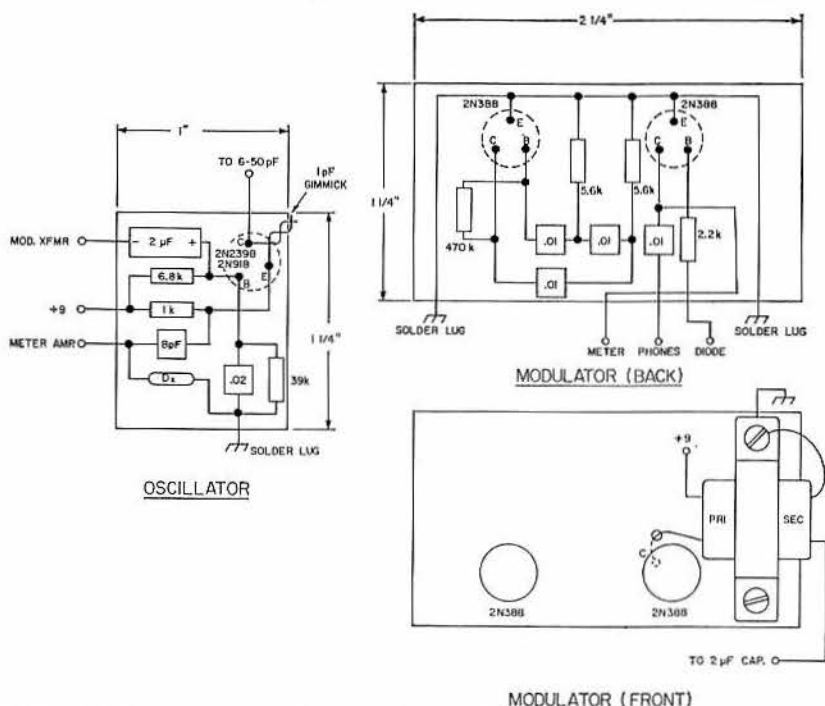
Layout of the two circuit boards used in the great dipper. Although two boards were used in this case, the circuit could be easily adapted to one board, and even to printed circuitry.
